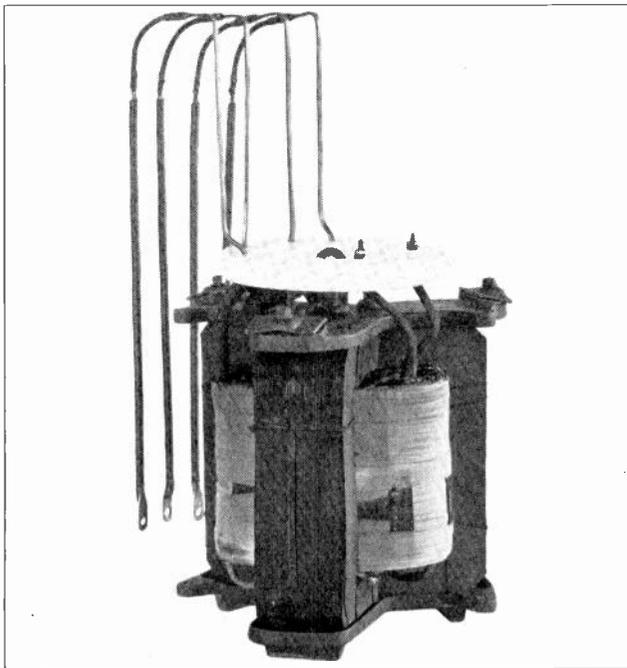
Complete transformer core and windings. Note how the legs of the core are assembled to form complete magnetic paths around the coils. (Photo Courtesy General Electric Co.)
